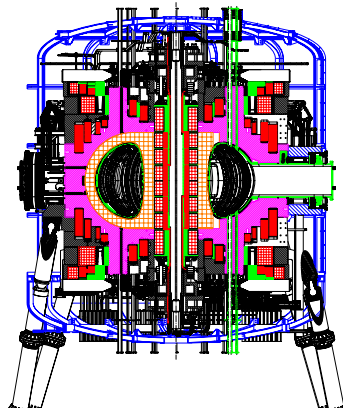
Vertical cross section of the Ignitor machine as presently designed.
